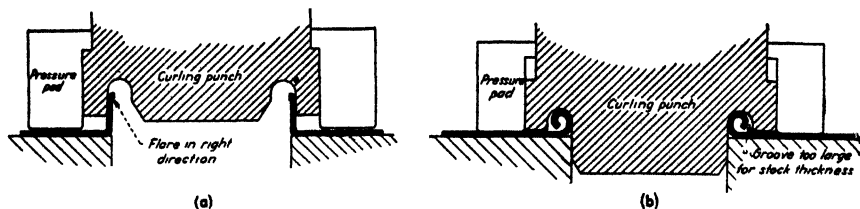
Inward curling (a) on an interior flange is easier than outward curling (b) because the stock is less likely to crack. For either, the groove size depends on the stock thickness.
